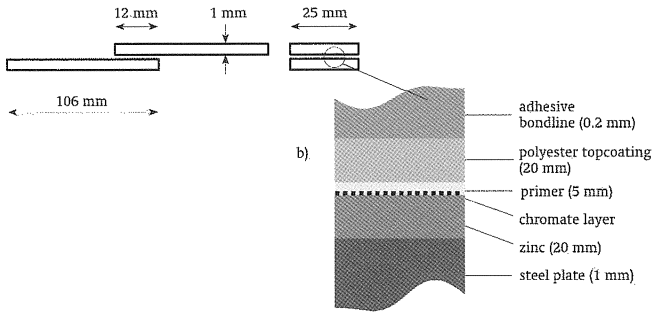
Studied overlap joint: a) geometry, b) cross-section coating
